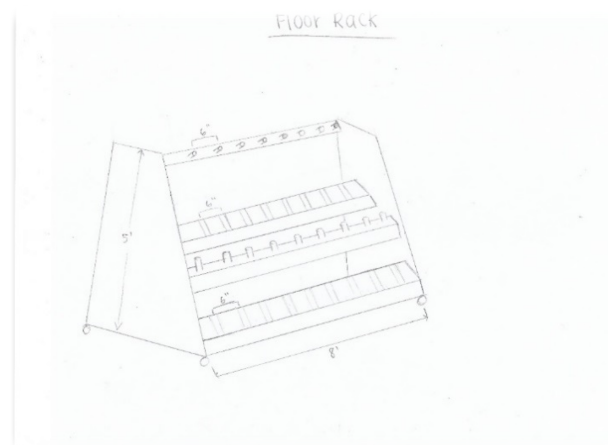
Floor Rack design. Image drawn by Alexis Clemente on 3/8/17.
